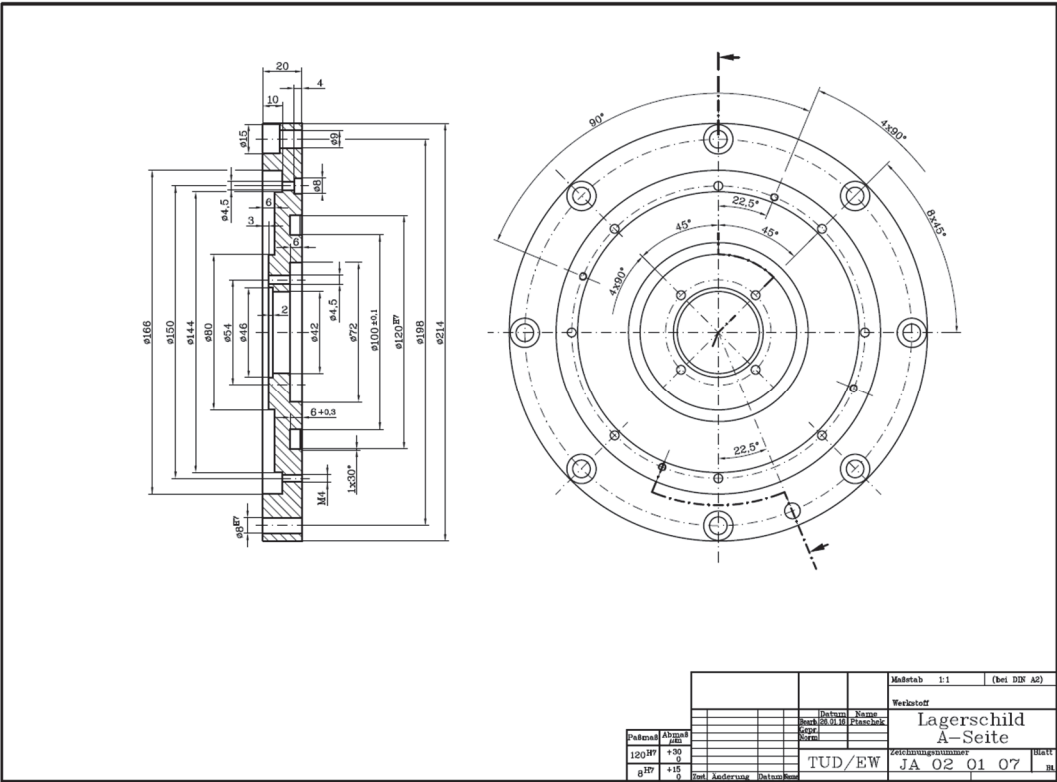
Drawing of end shield DE-side of the electric machine for the DE-REX powertrain (EM1, EM2, EM3, EM4)
